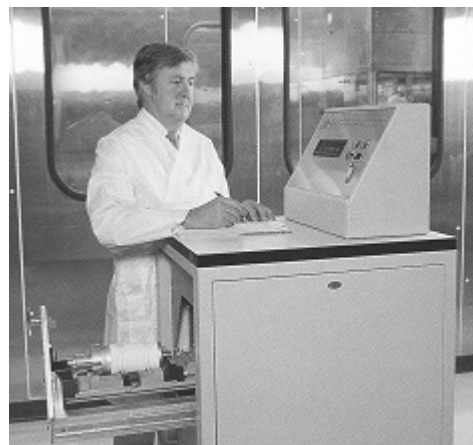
Vacuum Interrupter Pressure Measuring Machine in use at Vacuum Interrupters South Africa Limited.
